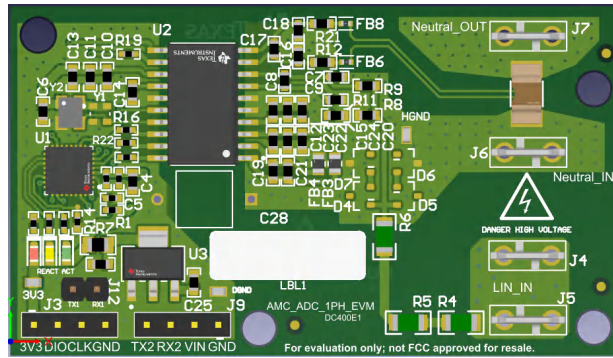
AMC-ADC-1PH-EVM Top PCB Drawing
